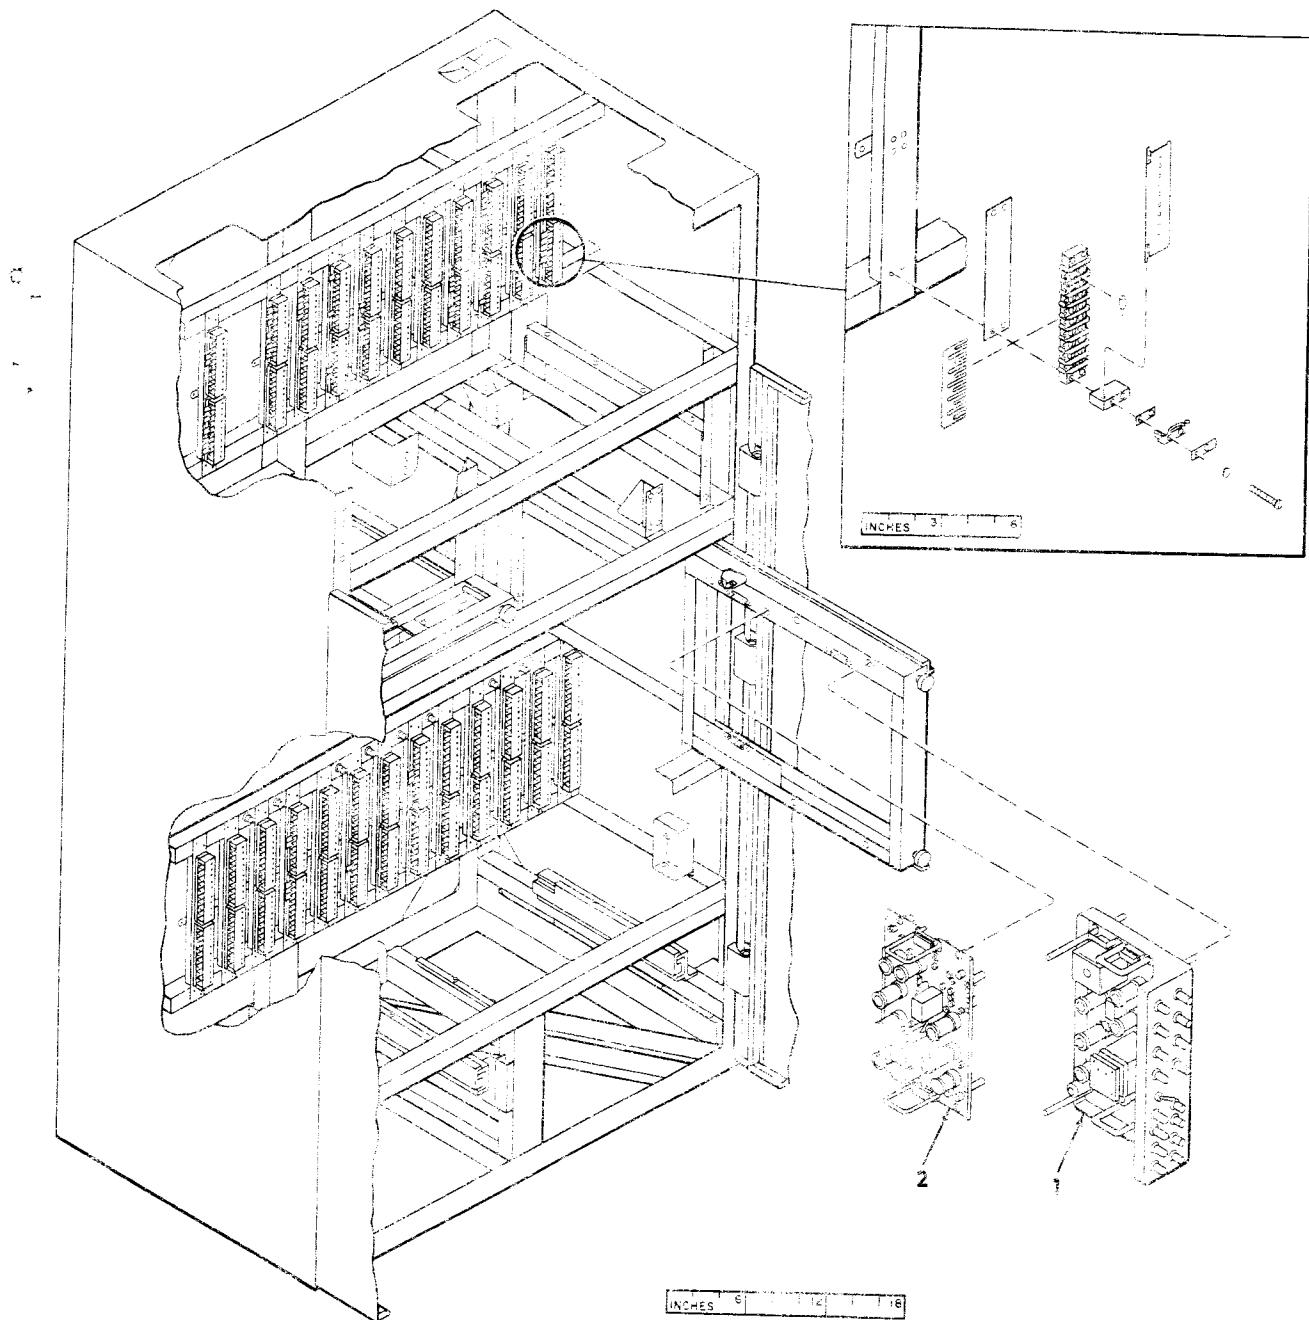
Control, receiver-transmitter (9141310) – partial exploded view
